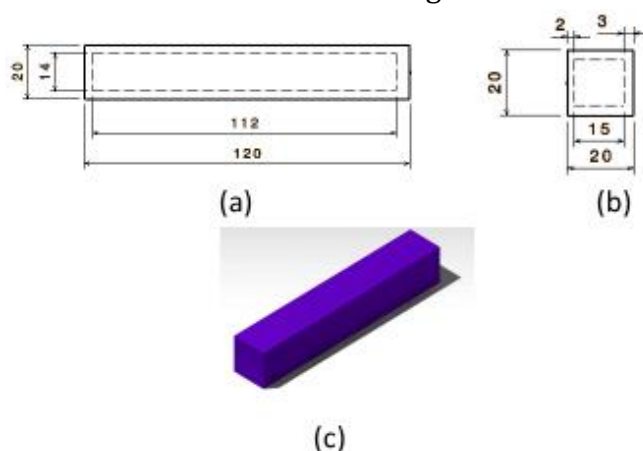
(a) Front view, (b) Side view, and (c) Isometric view of the single chamber SPA
